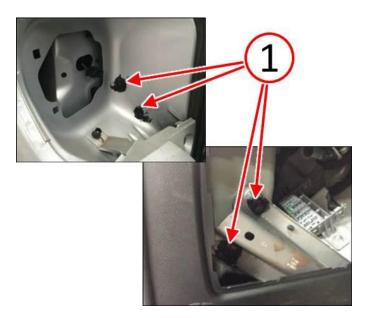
Cover Rivets With Polyurethane Adhesive Sealant
